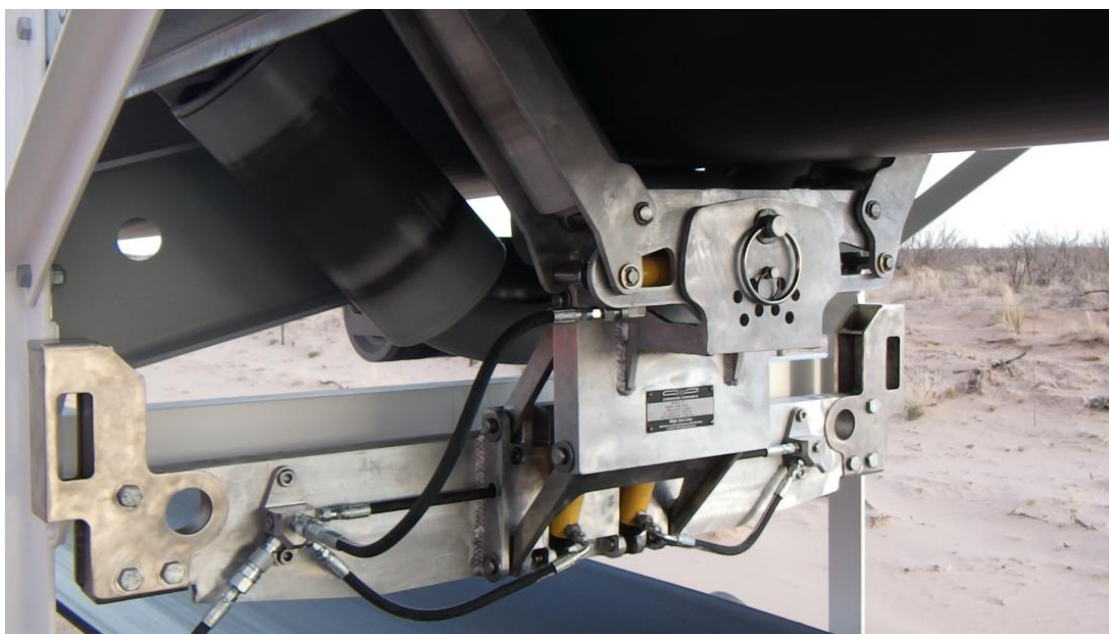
Hydraulic Belt Lifter tool in position with the operating and loaded belt lifted off the idler set
